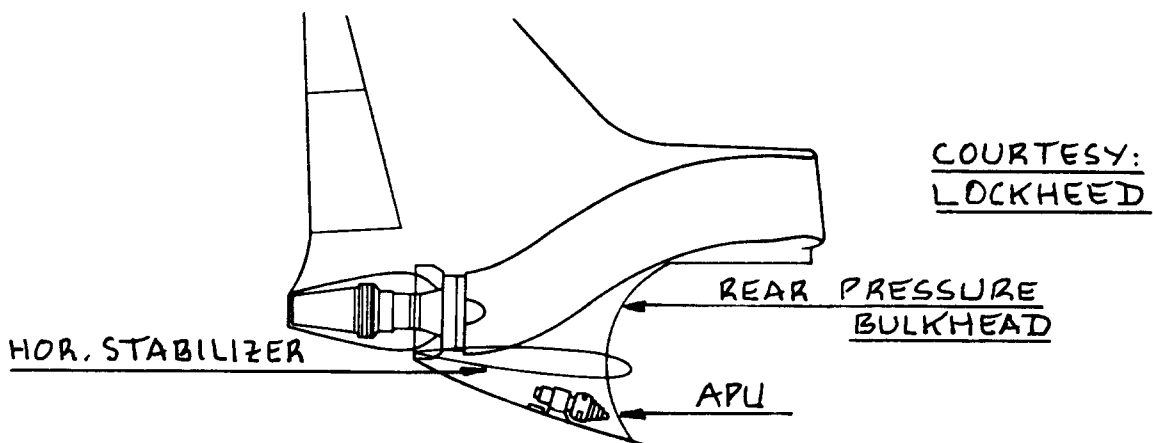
Center Engine Installation in the Lockheed L-1011
